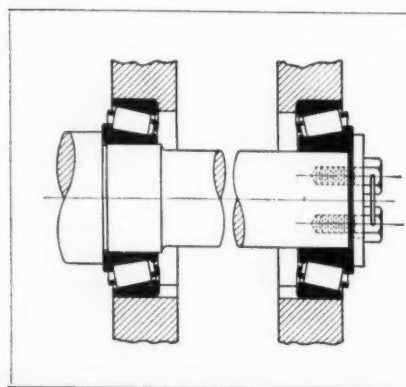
Method of Locating and Holding Roller Bearings with Spacer and End Caps
